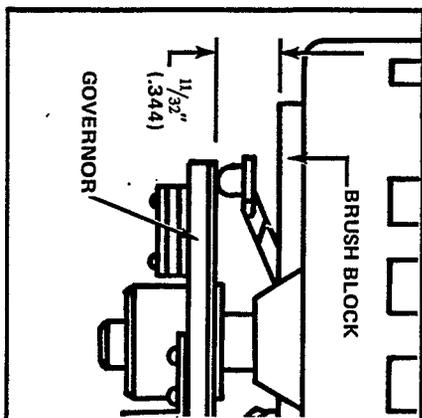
Loosening Governor Assembly (left) for Clearance Adjustment.
